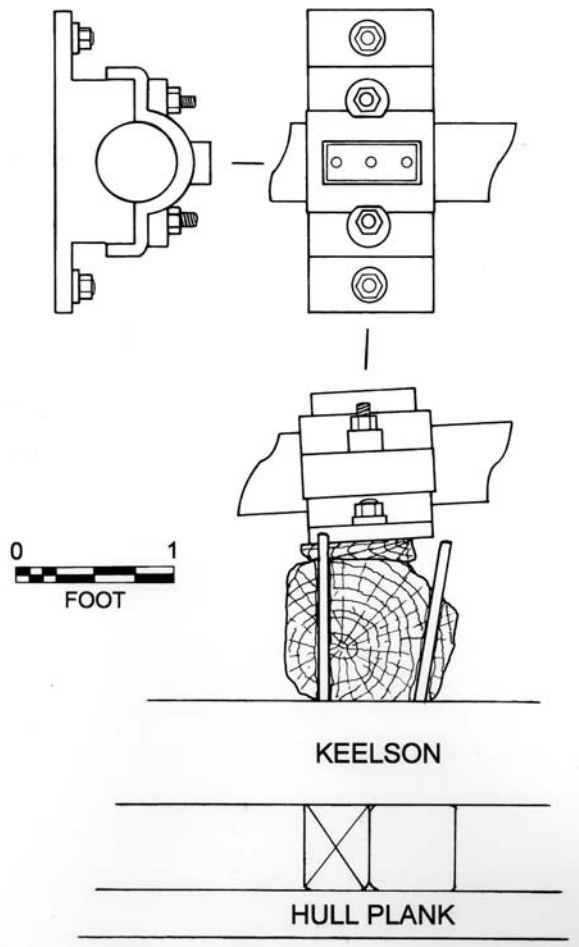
Plan, elevation, and end views of forward propeller shaft bearing. Drawing by Jim Bradford
